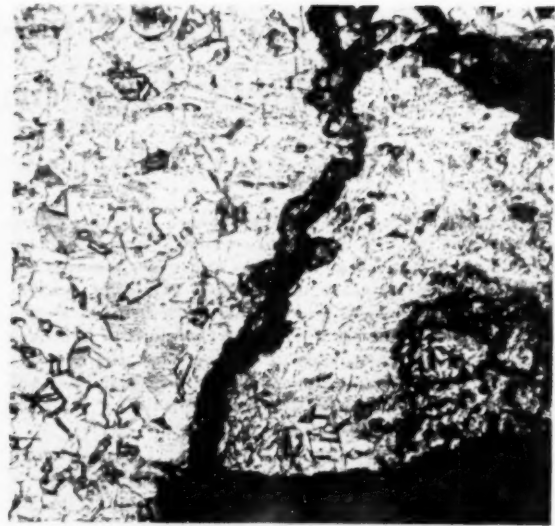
(a) LONGITUDINAL CRACK IN INSTRUMENT TUBING
